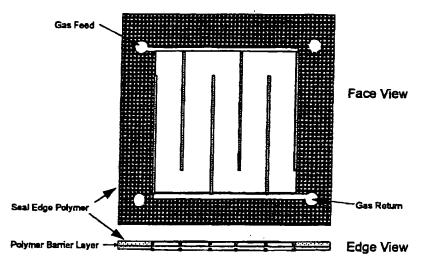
Two views of a bipolar separator plate produced by first constructing a gas barrier within a piece of foamed metal, then constructing a sealing barrier around the perimeter, and finally, adding the holes and grove structure.
